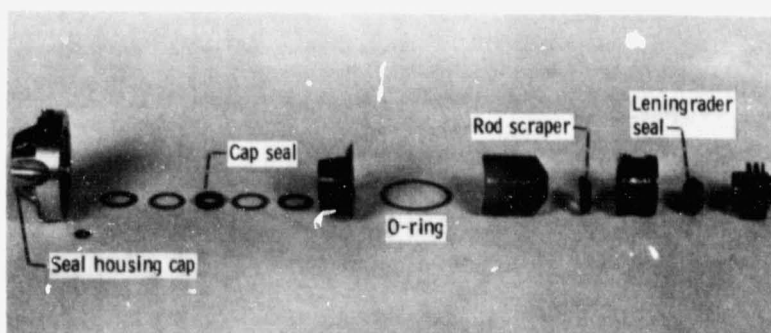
P40 Leningrader rod seal assembly stackup (original seal used in engine).
